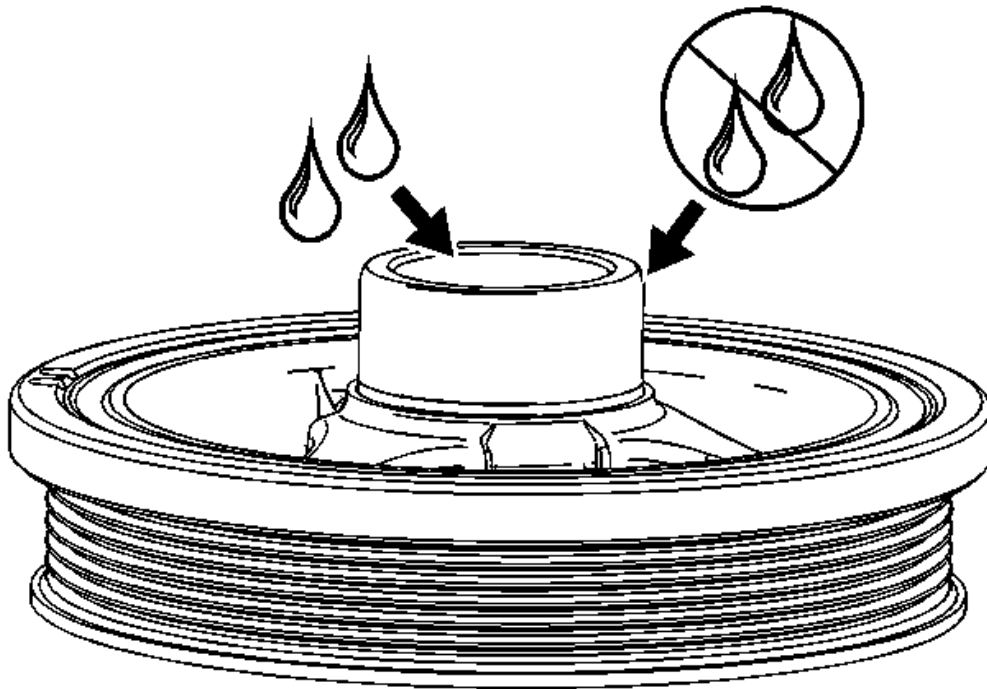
Identifying Lubrication & Non-Lubrication Areas On Crankshaft Balancer
